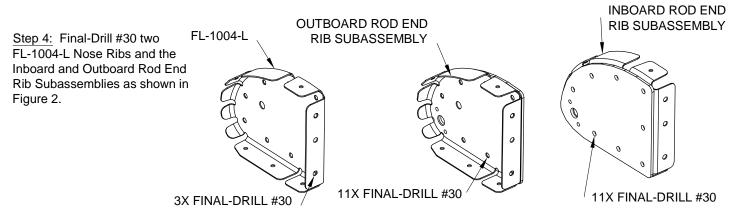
FINAL-DRILL NOSE RIBS AND ROD END RIB SUBASSEMBLIES - LEFT FLAP
